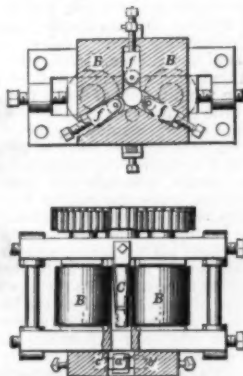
MACHINE FOR STRAIGHTENING AND ROUNDING SHAFTING.
